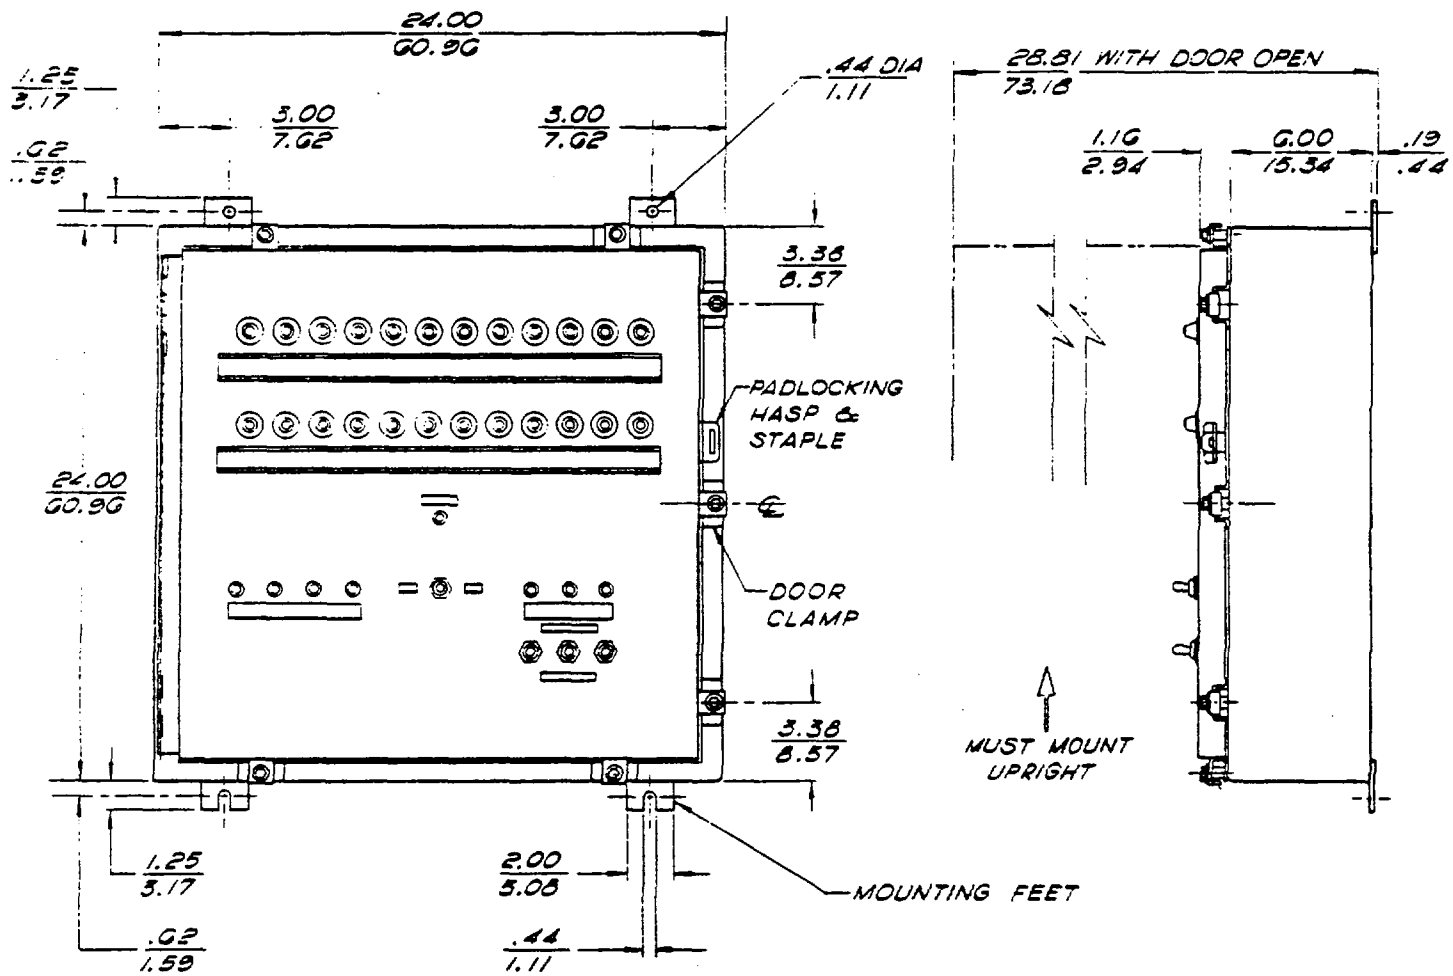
Repeater Cabinet Dimensions and Mounting Details, Lines 1 through 24. SKC-148131
